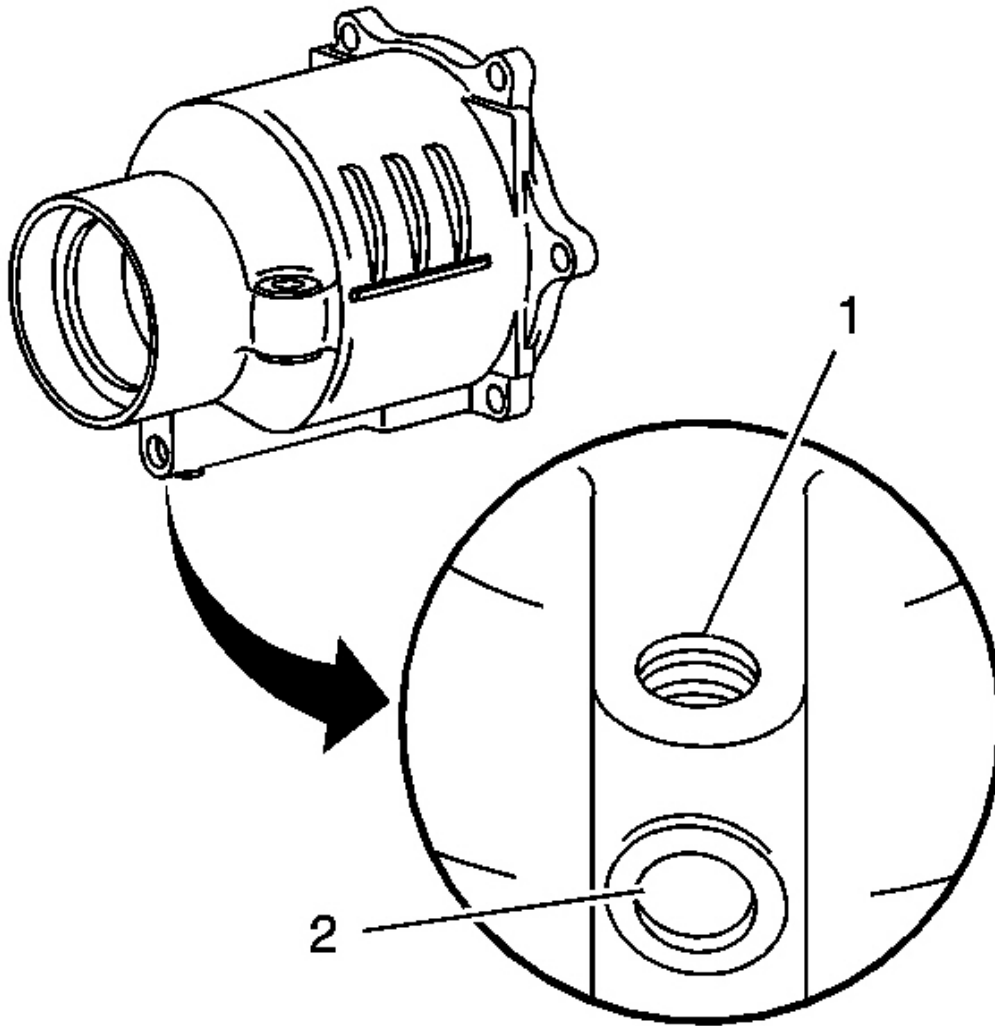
Cleaning Drain Plug Threads & Check Welch Plug For Leakage, Rust Holes & Looseness
